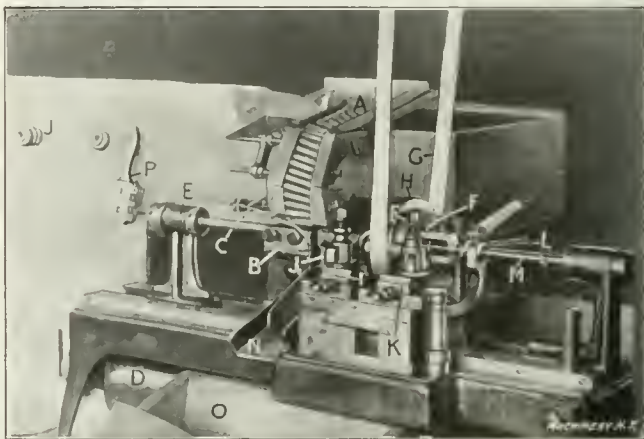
Trimming Machine for Trimming the Head and Mouth, and for Trimming the Shell to the Desired Length
